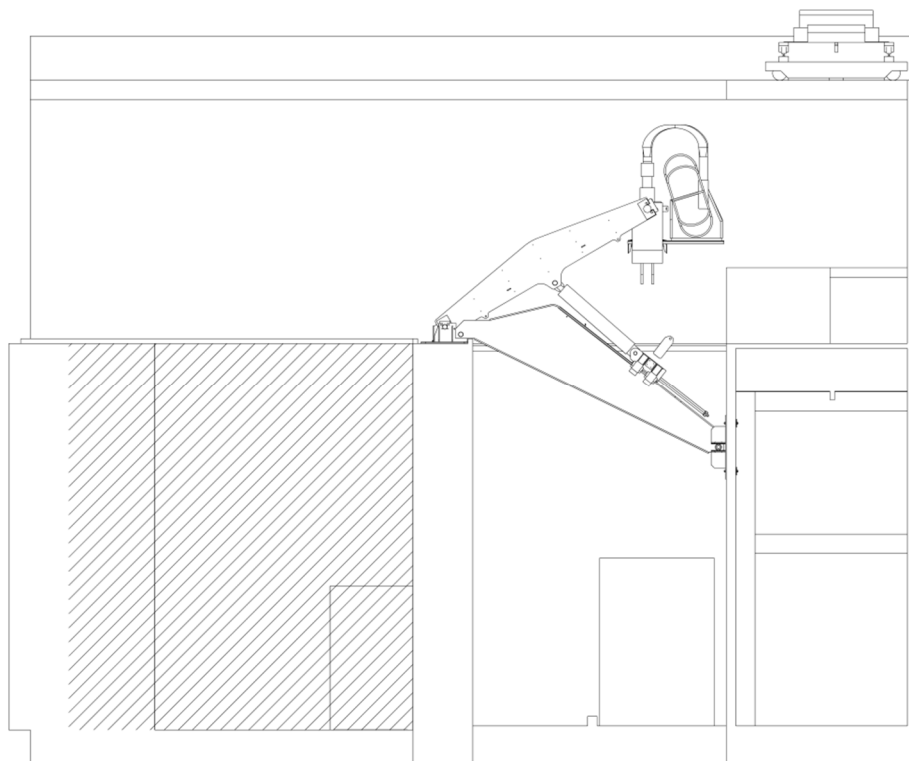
HI-LIFT Maintenance Position (Illustr.) Elevation View
